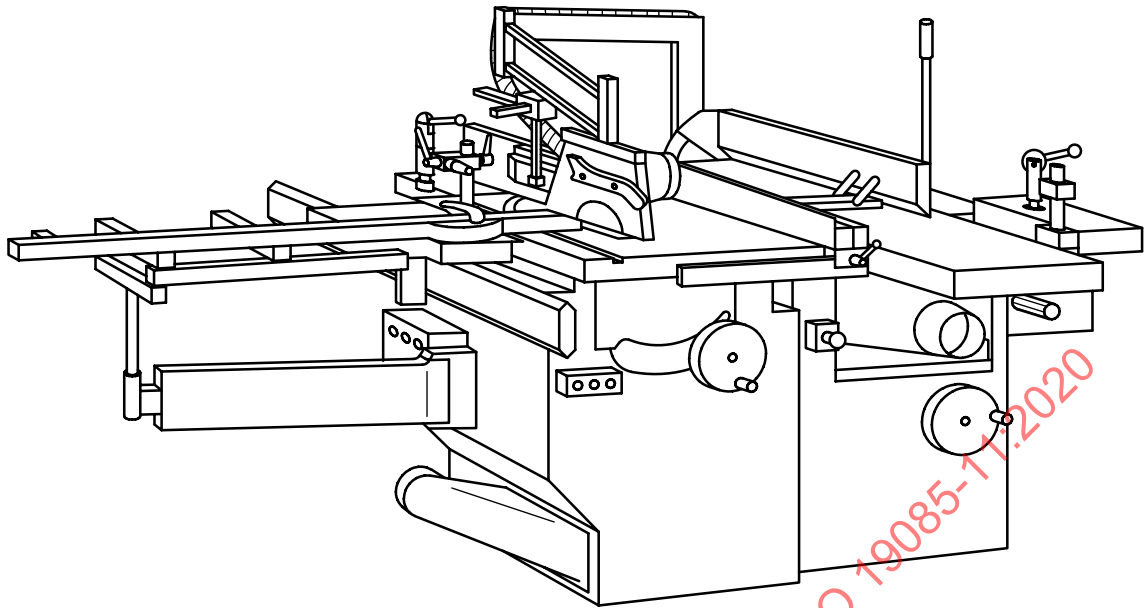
Example of a machine with table saw, moulding and planing units, with a mortising device, fitted with a sliding table
